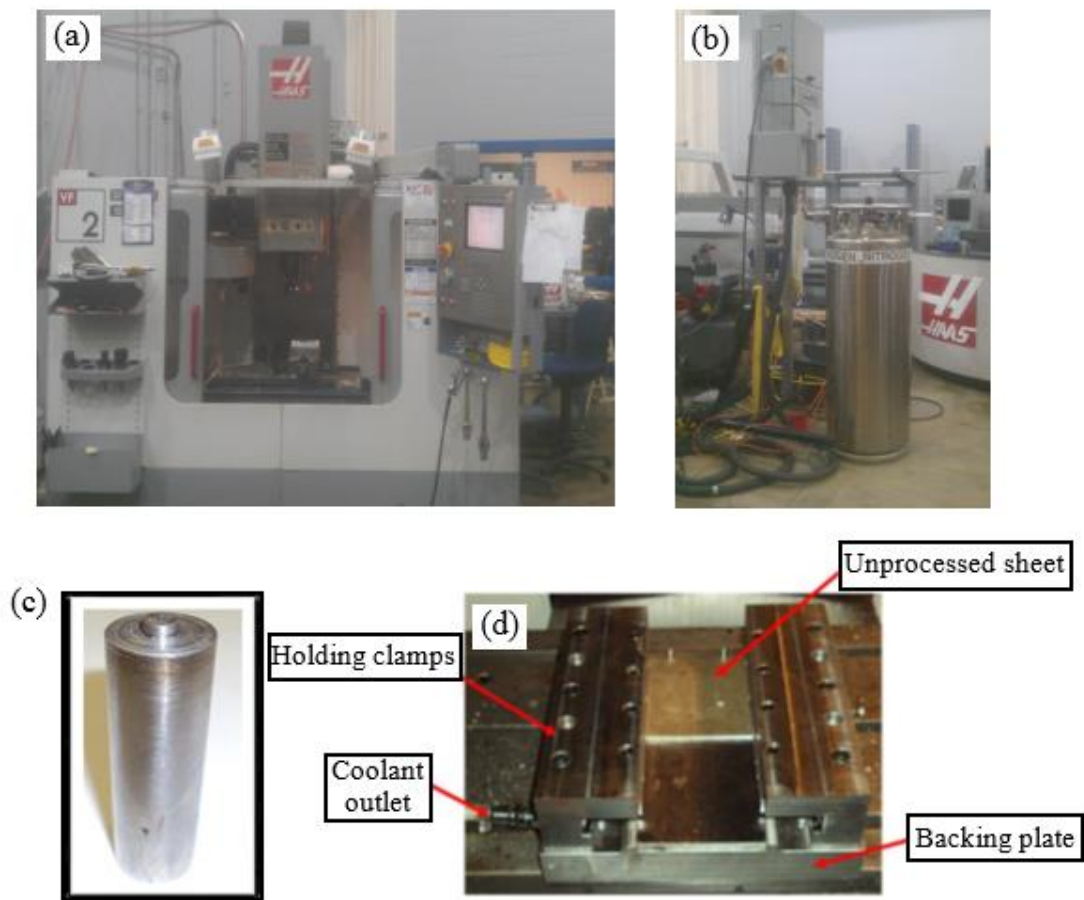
Equipment used in the FSP experiments: (a) Hass CNC machine tool VF-2; (b) ICEFLY[®] coolant delivery system; (c) FSP tool; and (d) Clamping system.
